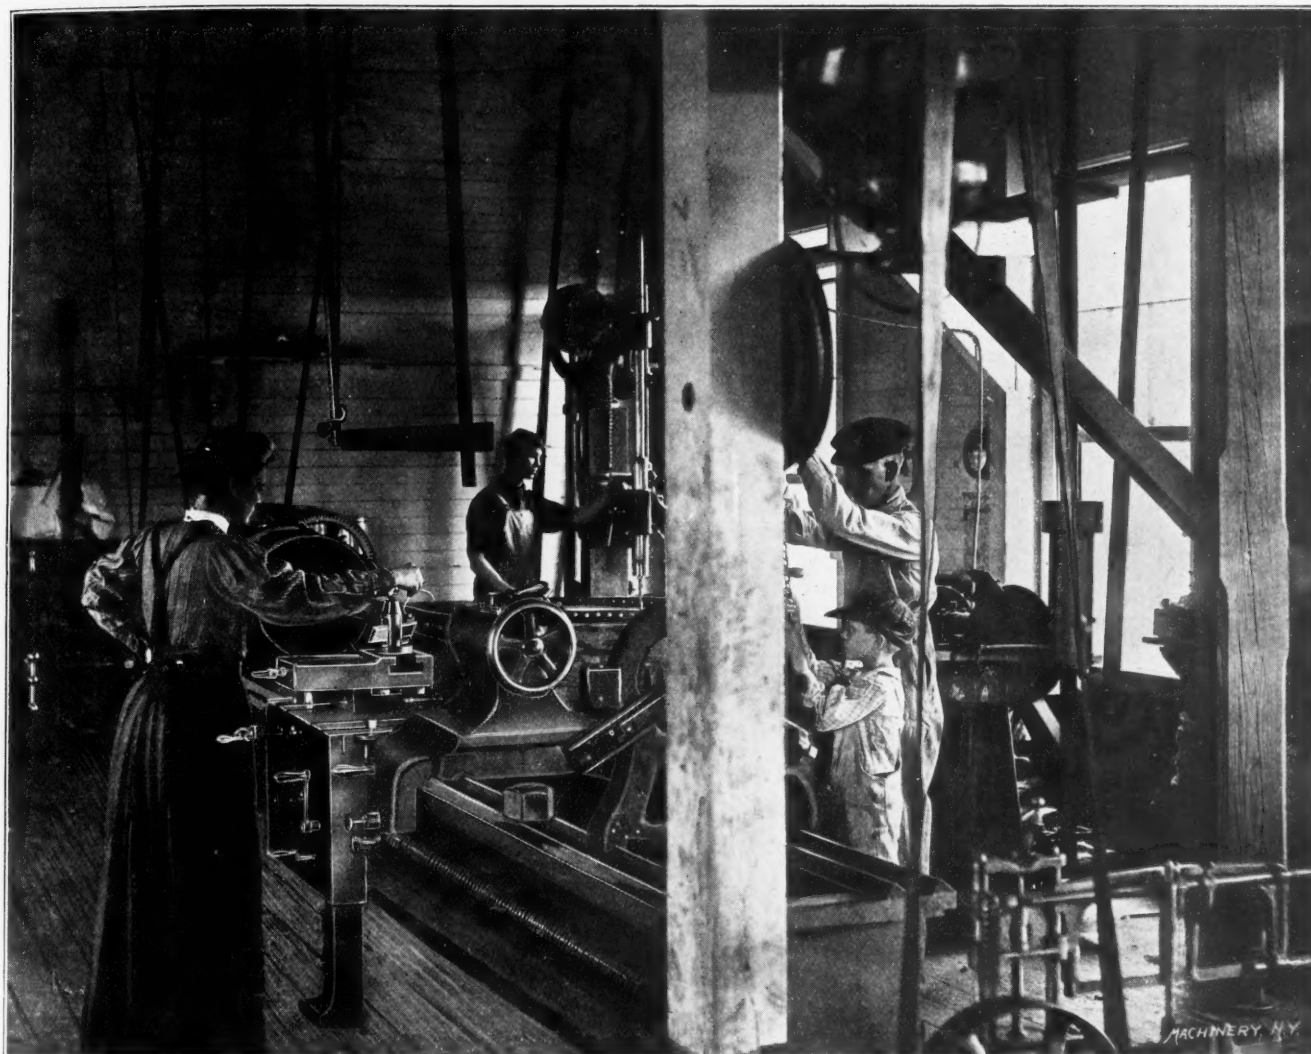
A Southern Machine Shop; All Hands at Work; Mrs. Parkins Turning a Piston Rod
